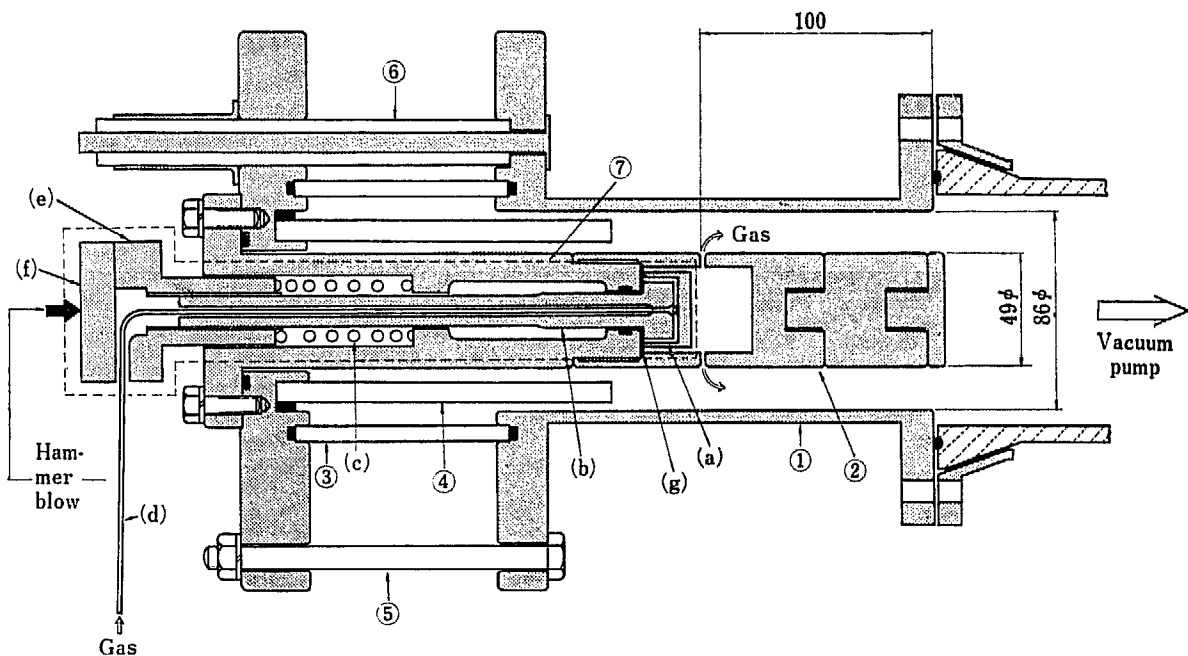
Cross-Sectional view of the coaxial type plasma gun
